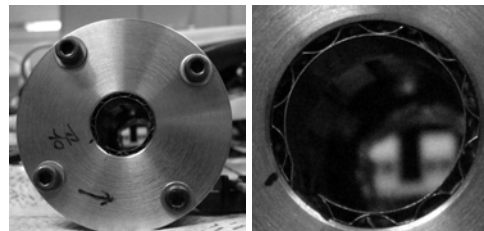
(a) Two-dimensional view and (b) cross-sectional view of preliminary layout of micro turbine generator
